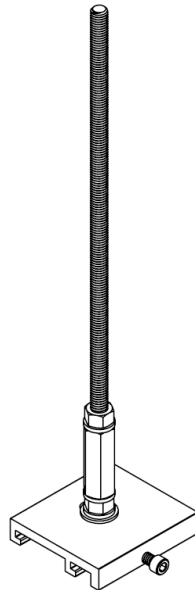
Tighten the Hex Nut on the Threaded Rod So All Lock Washers are Fully Compressed
